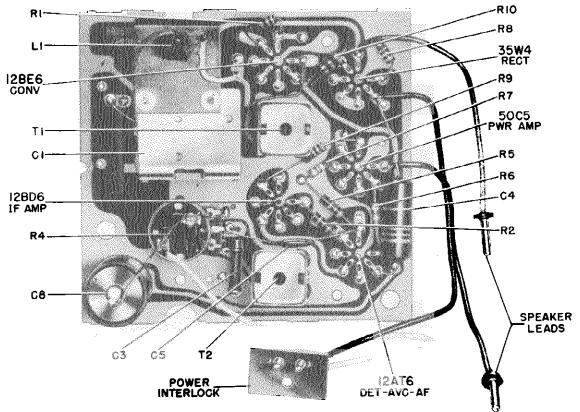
FRONT VIEW OF CHASSIS (EARLY MODEL)
